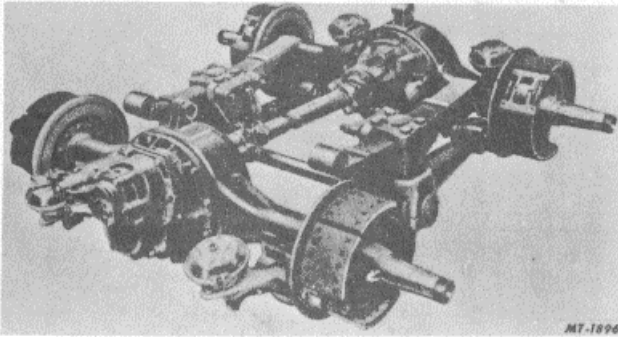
Tandem Axle with Equalizing Beam Suspension
